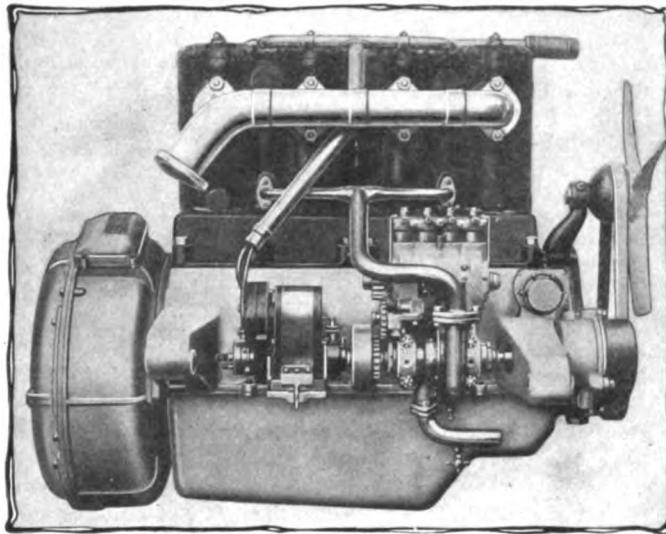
Exhaust side of the new motor, showing disposition of chain-driven magneto and pump
